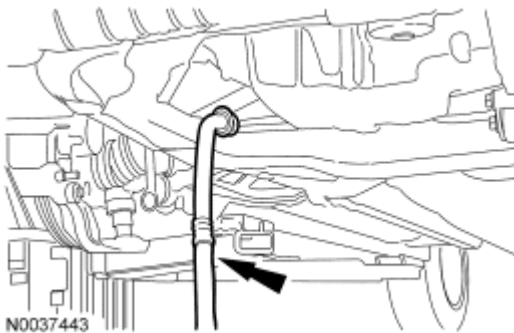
Locating Power Steering Pressure (PSP) Tube
